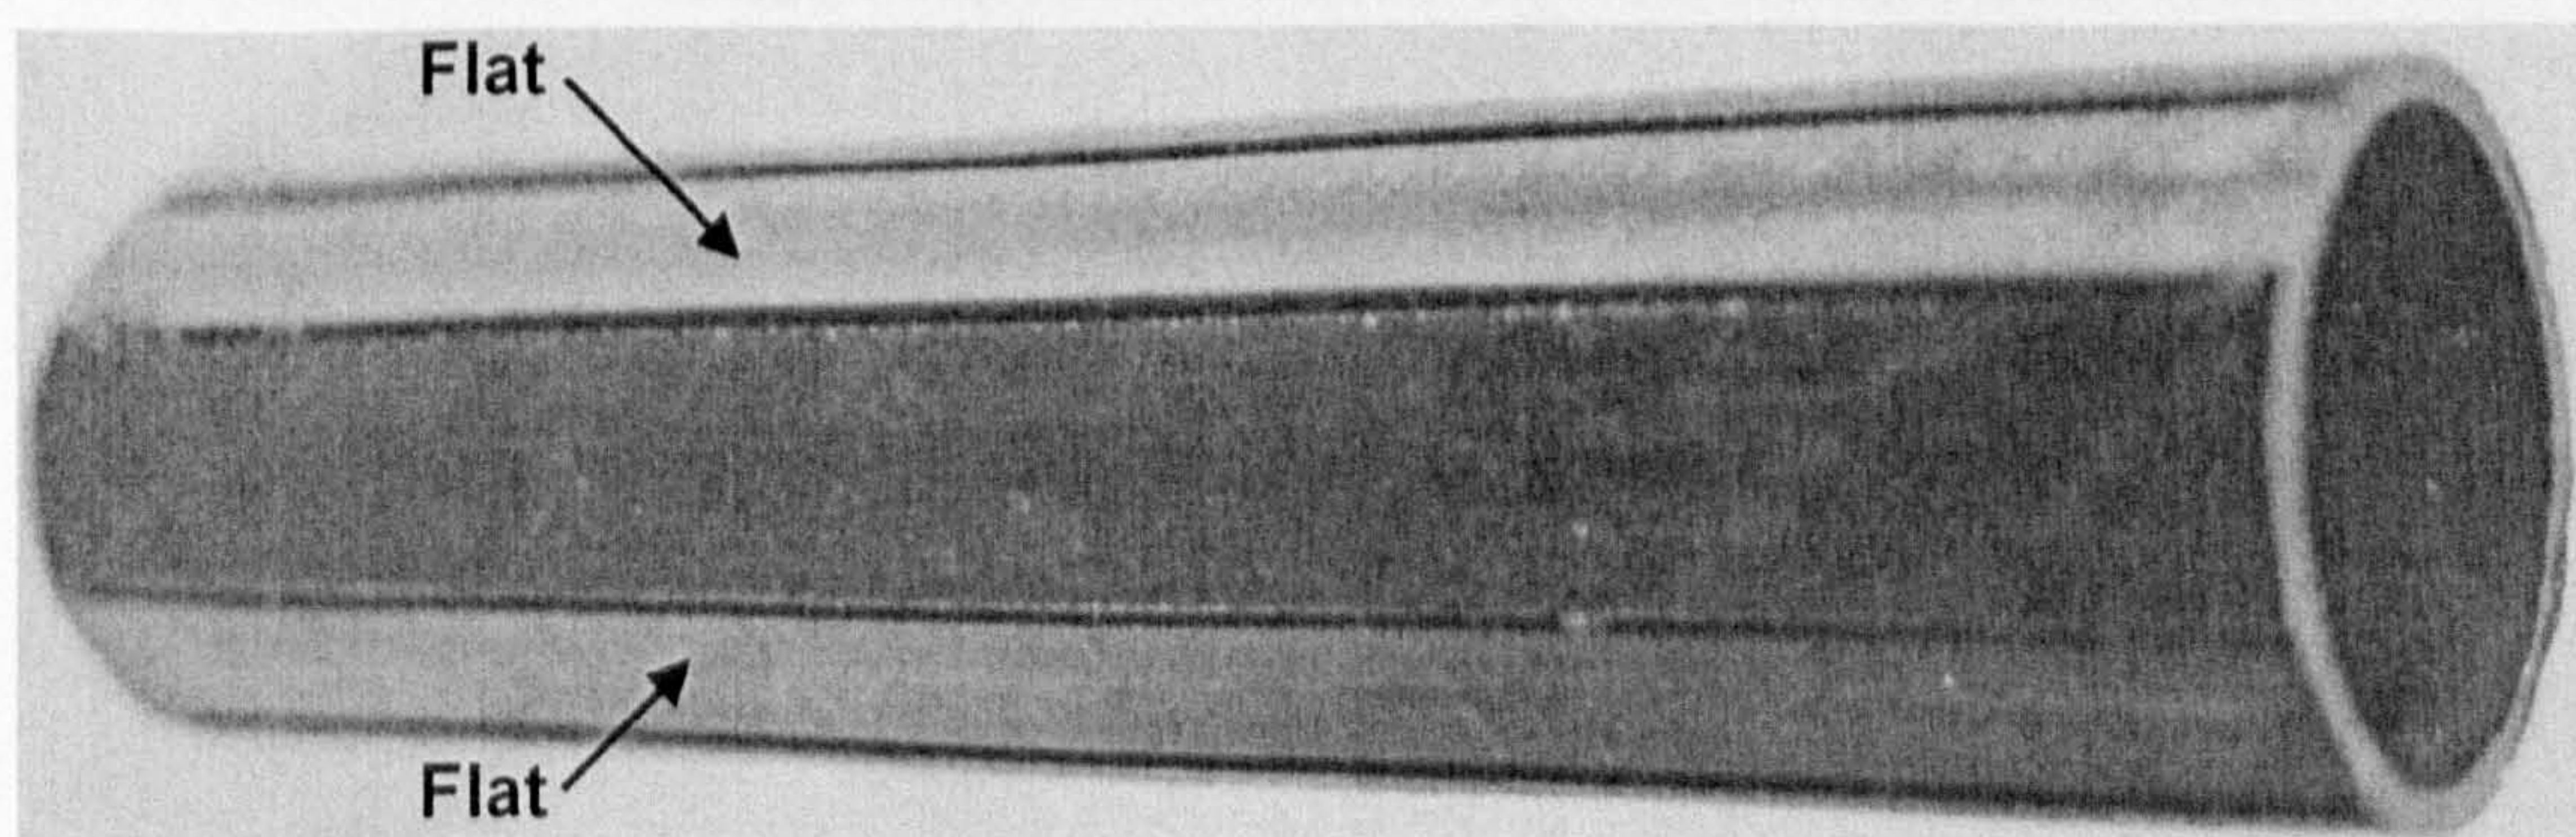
View of the pipe being partially machined (for extraction of flat tensile test specimens).
